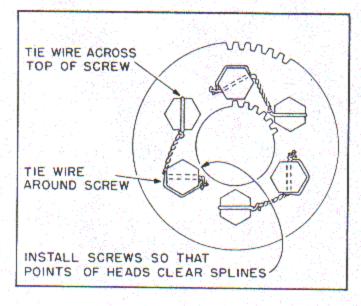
Positions and Lockwiring of Pinion Gear Attaching Screws
